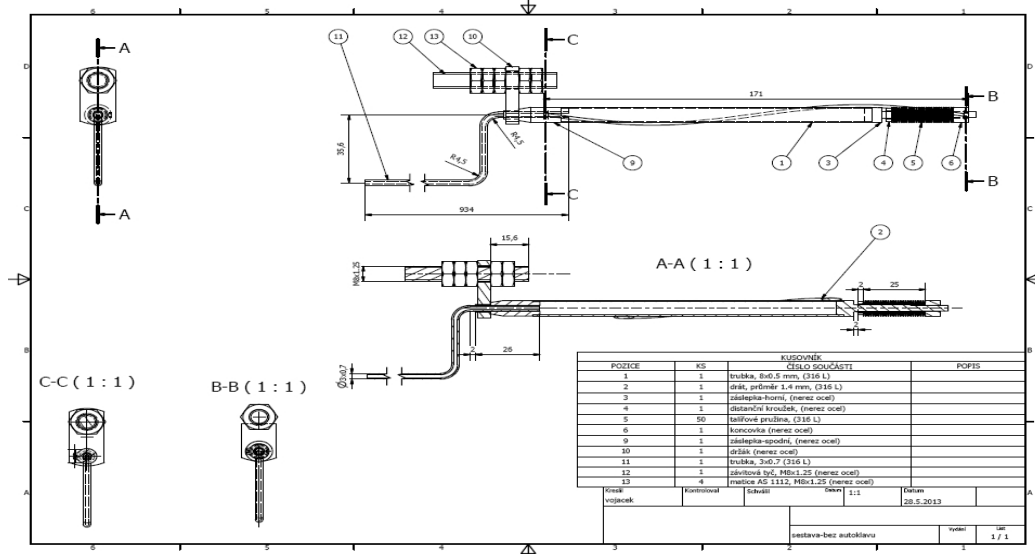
Design technical drawing of the fuel pin mock-ups including the wire wrap.
